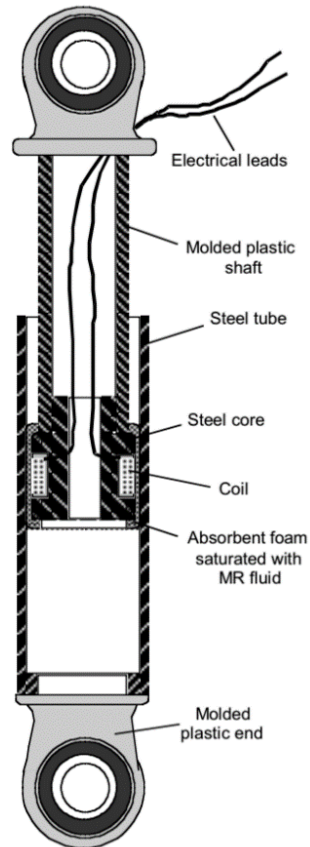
Cross-sectional view of MR damper with sponge design [20]
